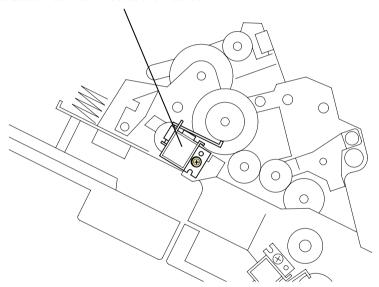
Transfer Roller Pressure Solenoid Removal
